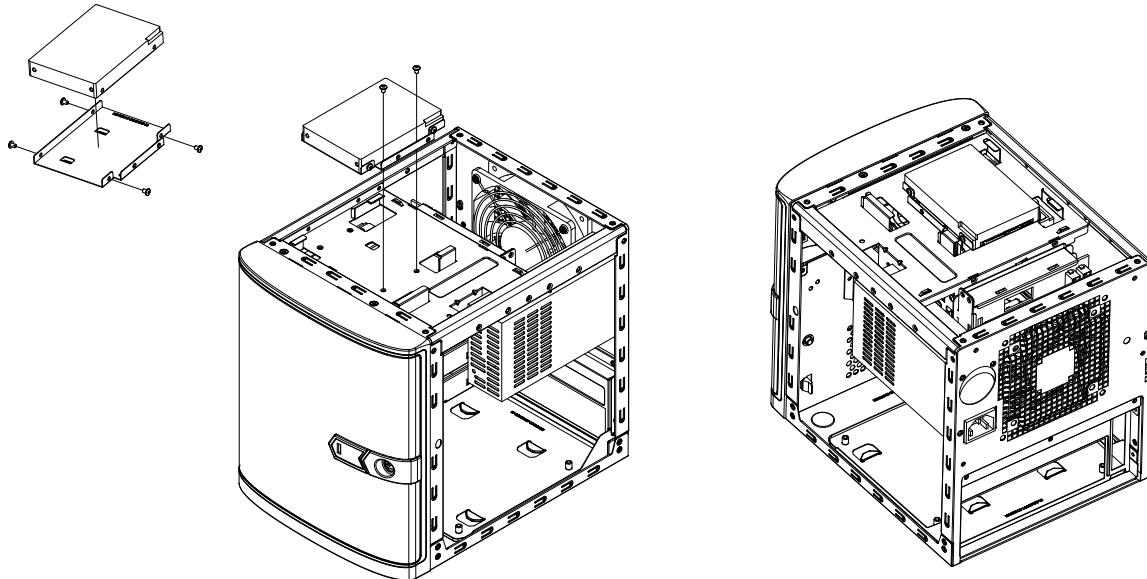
Installing the Top Mounted Fixed Hard Drive
